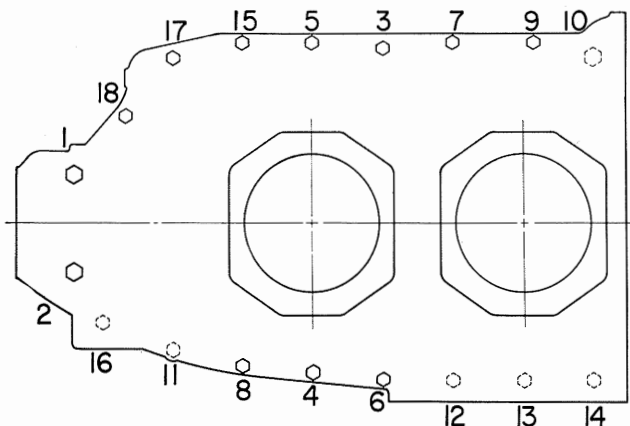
Proper Sequence for Tightening Crankcase Fastenings
